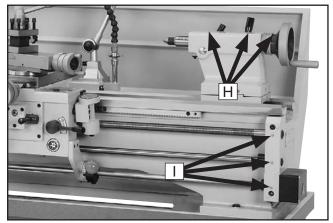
Tailstock and leadscrew end bearing ball oilers.
